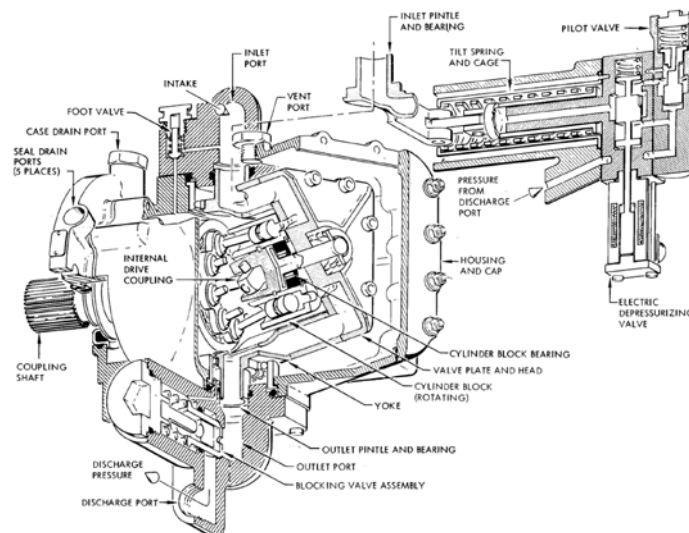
Engine-driven pump Yoke type (Bomba manejada por motor tipo yugo)
